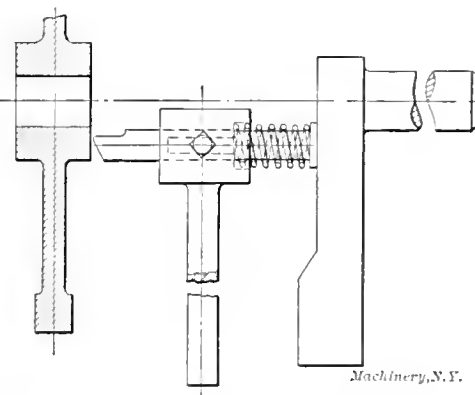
Facing Hub and Rim of a Gear Blank by the Tools shown in Figs. 2 and 3.
